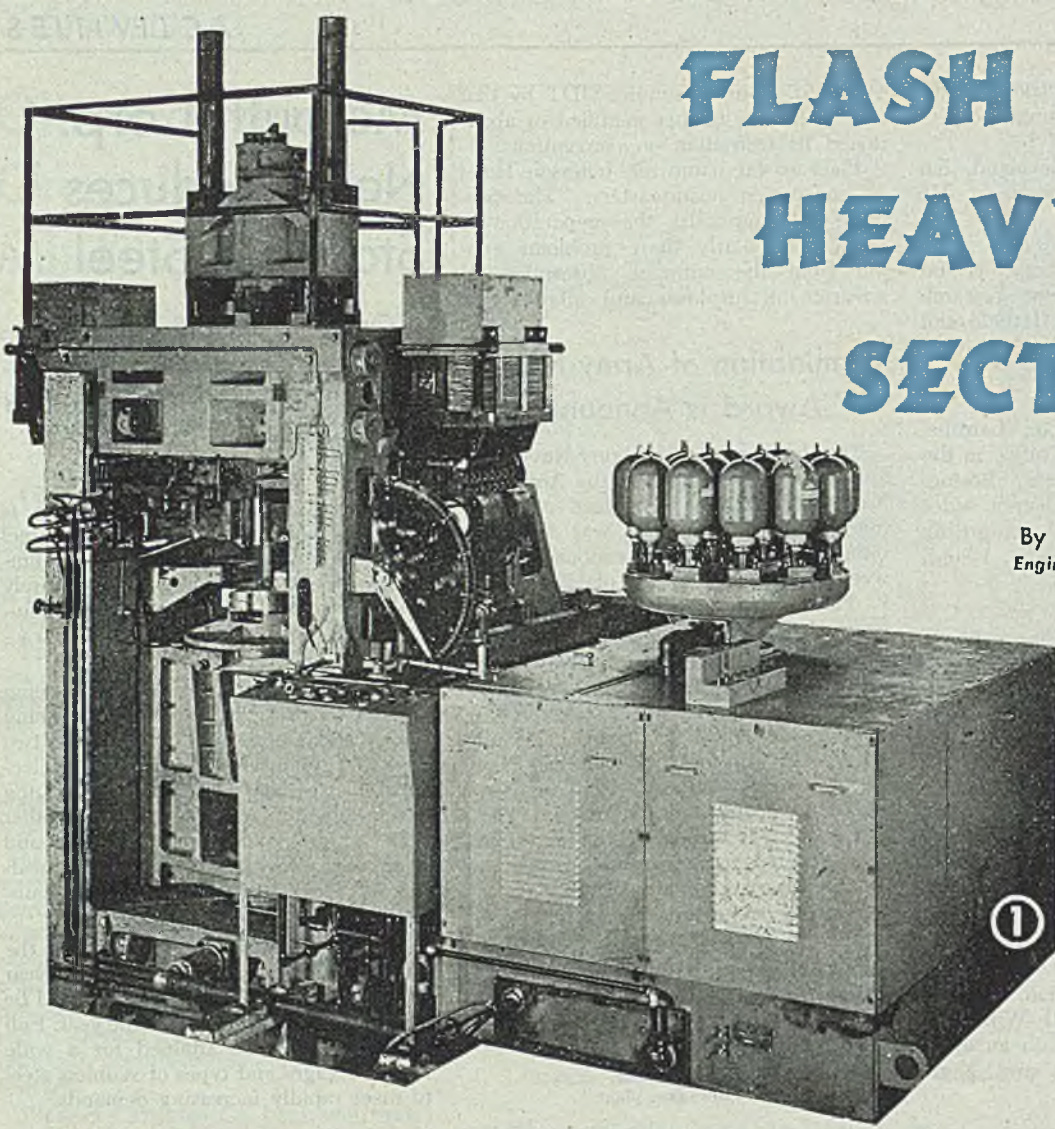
Reported to be the world's largest vertical type flash welder. This machine built by Taylor-Winfield Corp. can readily join 6-in. diameter solid steel sections. It is rated at 1200 kva and designed to join jet engine steel shafts and bucket wheels
